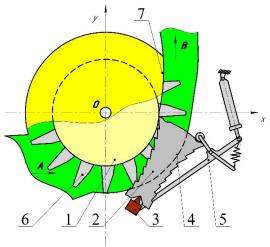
Scheme of a modern beater-knife cutting machine (cross-section): 1 – beater; 2 – knife; 3 – beam for installing knives; 4 – pallet; 5 – knife springing mechanism; 6 – beater finger; 7 – upper plate of the channel for movement of cut raw materials
